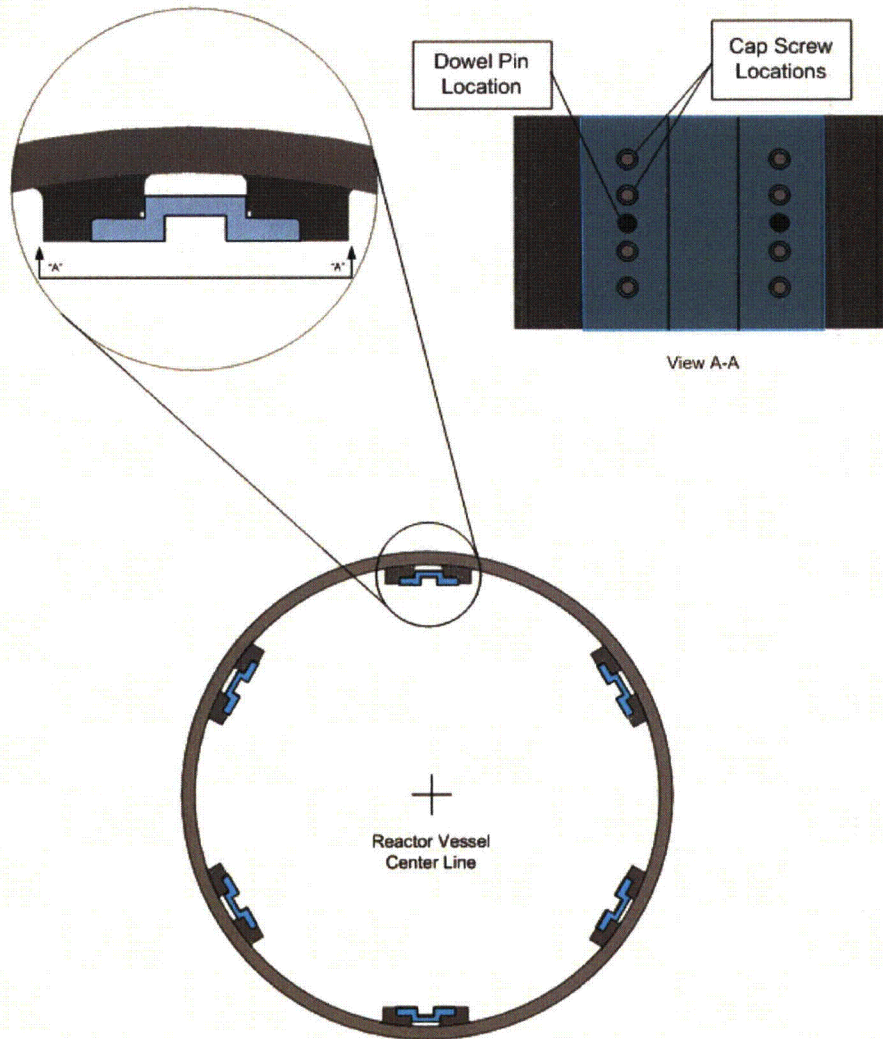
Example of Lower Radial Support Clevis Insert, Cap Screw and Dowel Pin Locations
